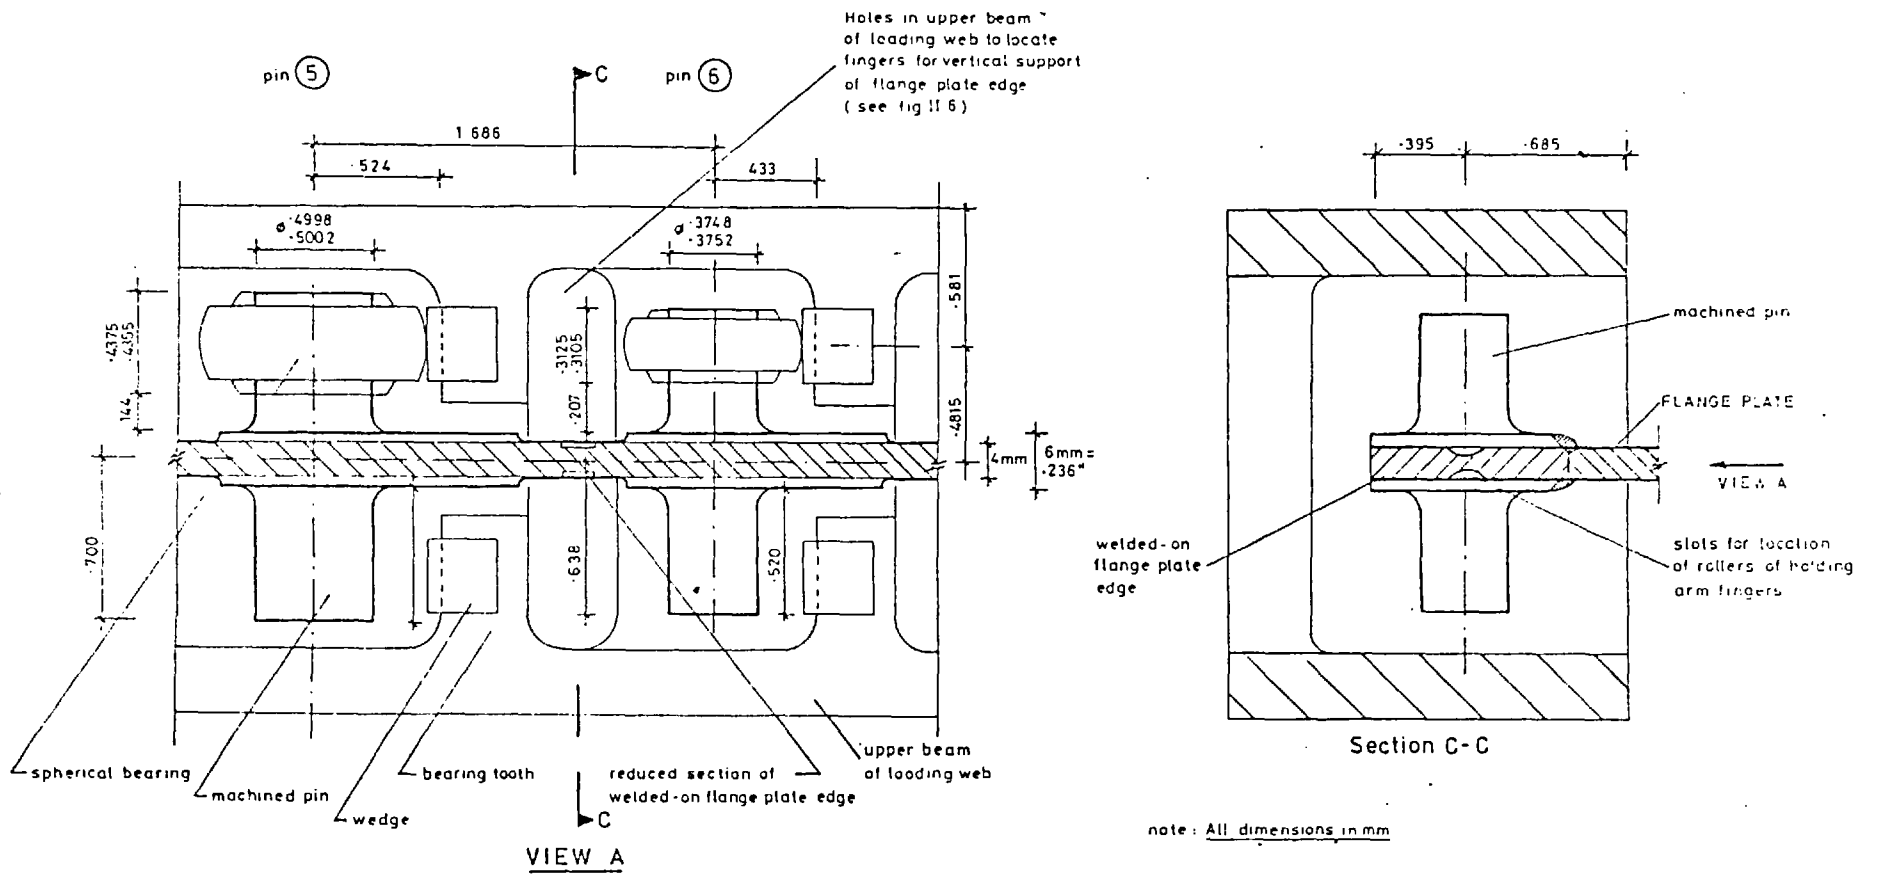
Details of upper beam of loading webs at teeth ⑤ and ⑥
